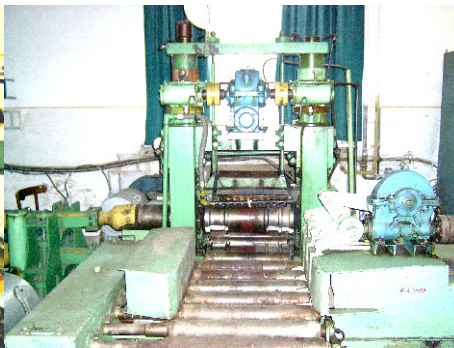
Assembly of the experimental Rolling Mills. Front of view
